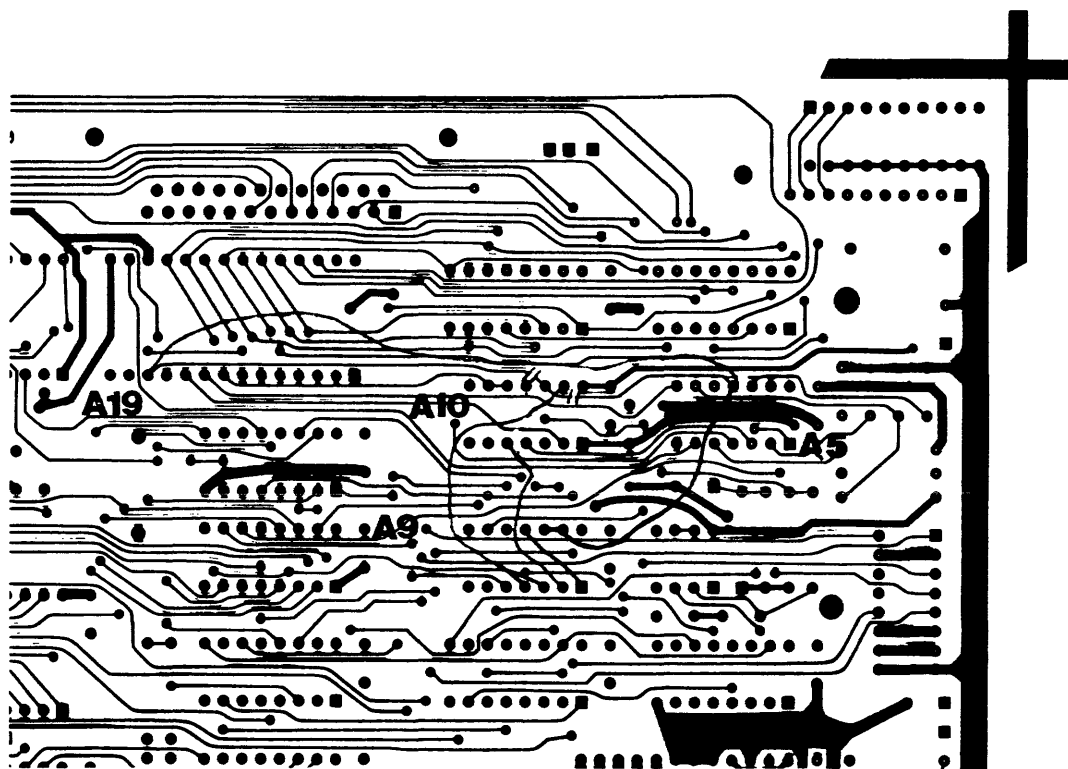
Cuts and Jumpers on Solder Side of Logic Board
